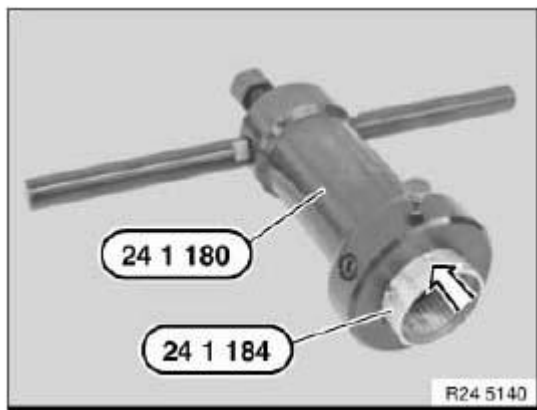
Sliding Special Tool 24 1 184 Into Extractor 24 1 180
